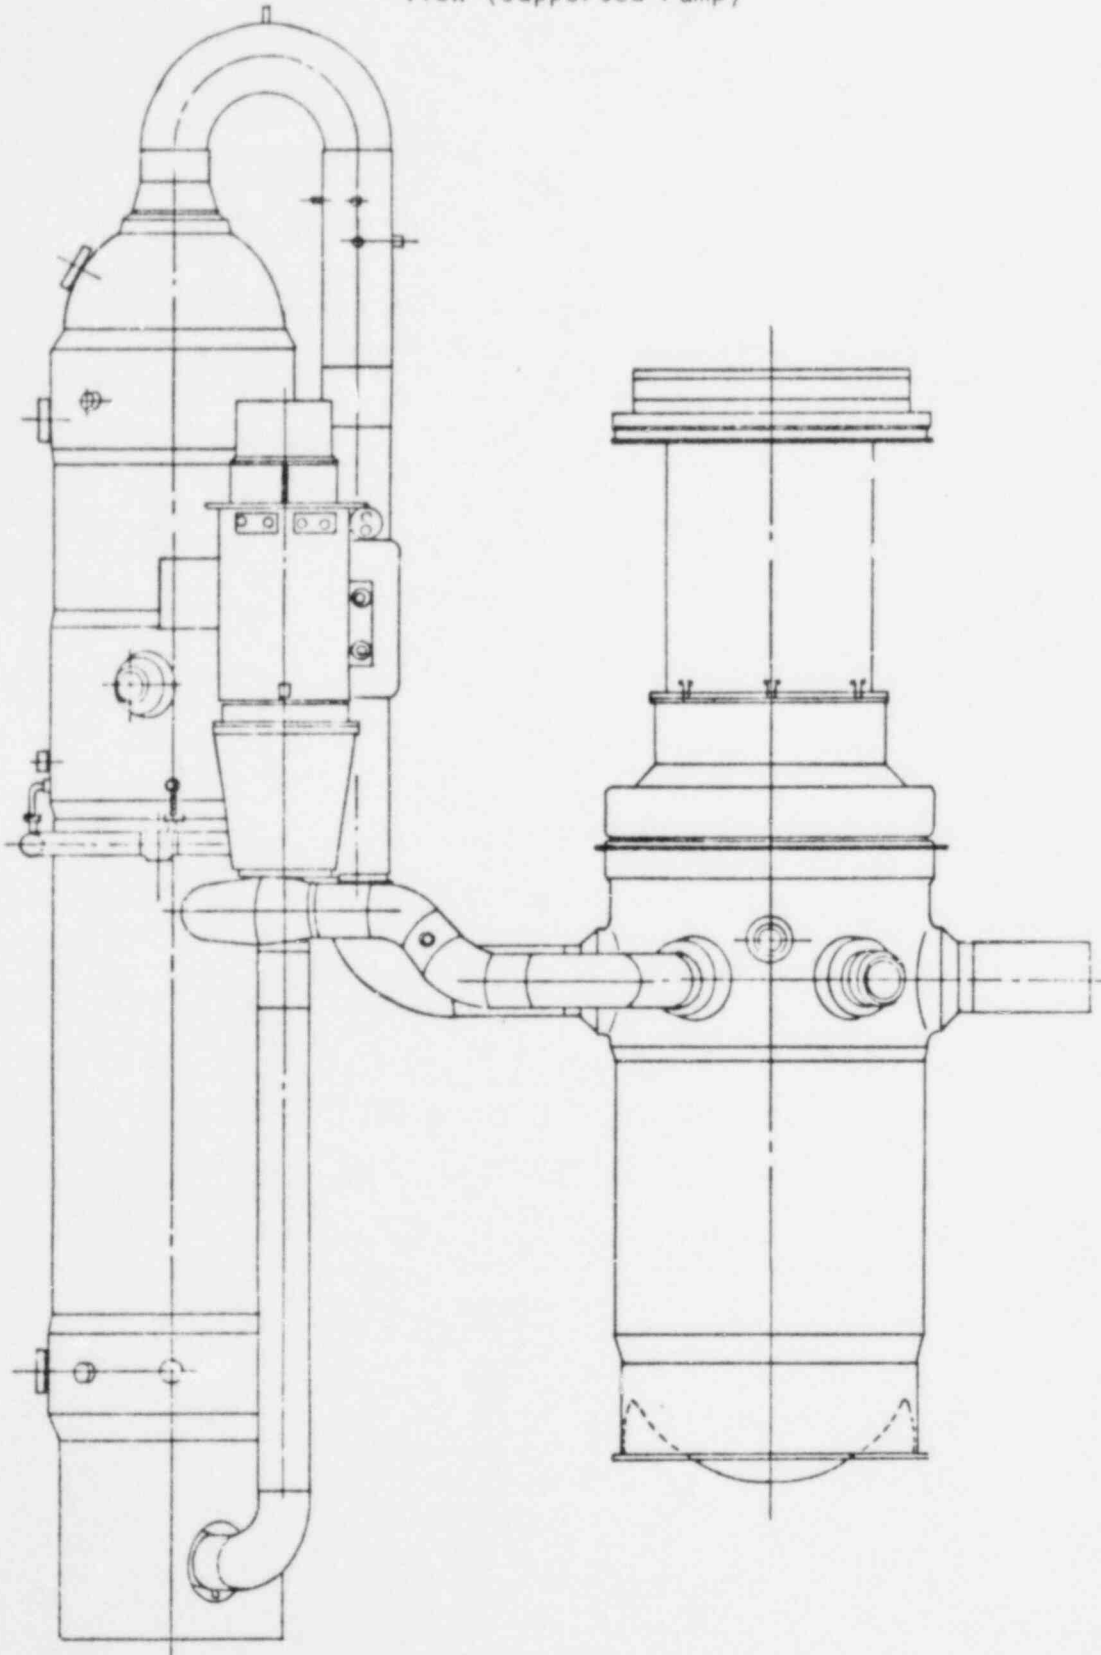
Skirt-Supported Plant, Plan View (Supported Pump)
